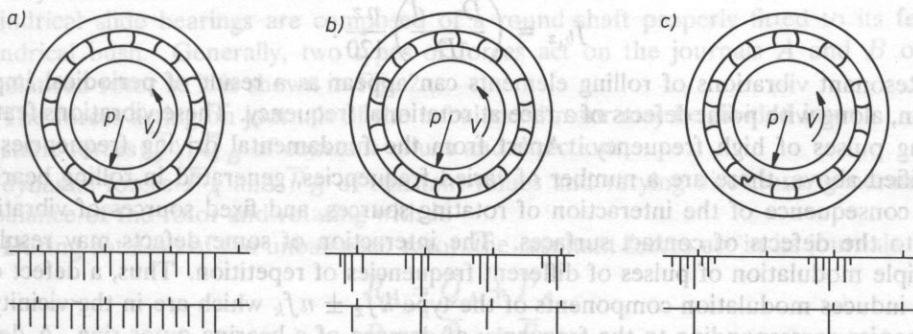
Typical kinds of bearing failures causing periodical vibroacoustic pulses.
